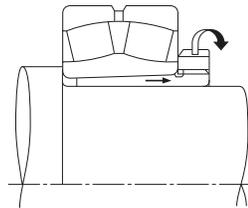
Removal of Withdrawal Sleeve Using a Withdrawal Nut (1)
